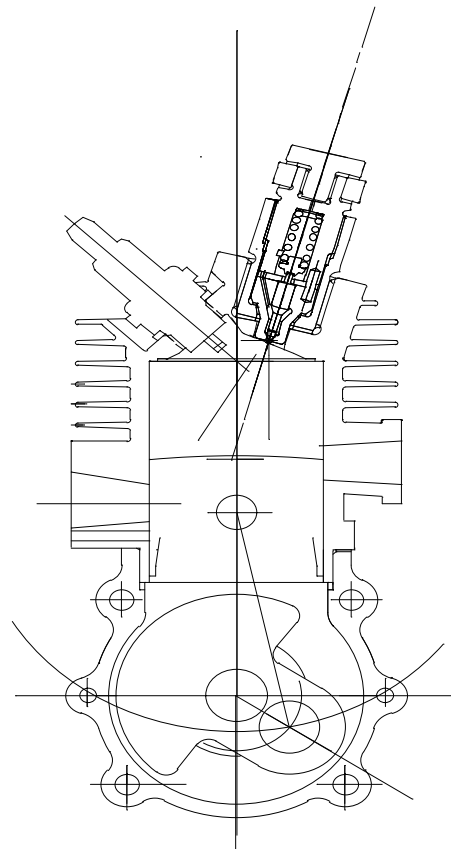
Utility Engine, Cross-Section Through Engine and Injector
